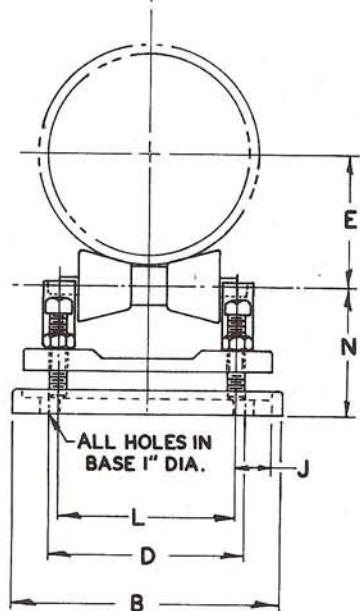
Chair No.	Bare Pipe Size	Pipe Size of Covering Protection Saddles to be used with Fig. 53 Adj. Chair and Roll
